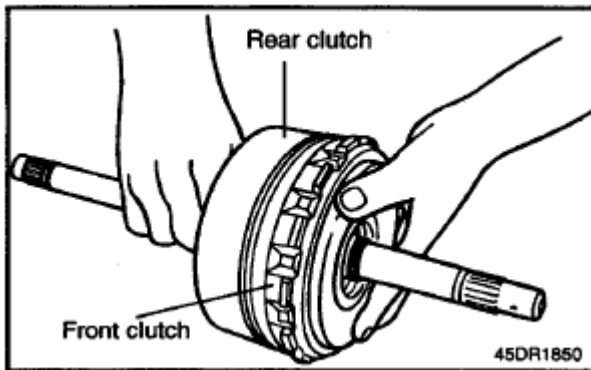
Identifying Rear Clutch & Front Clutch Assemblies
